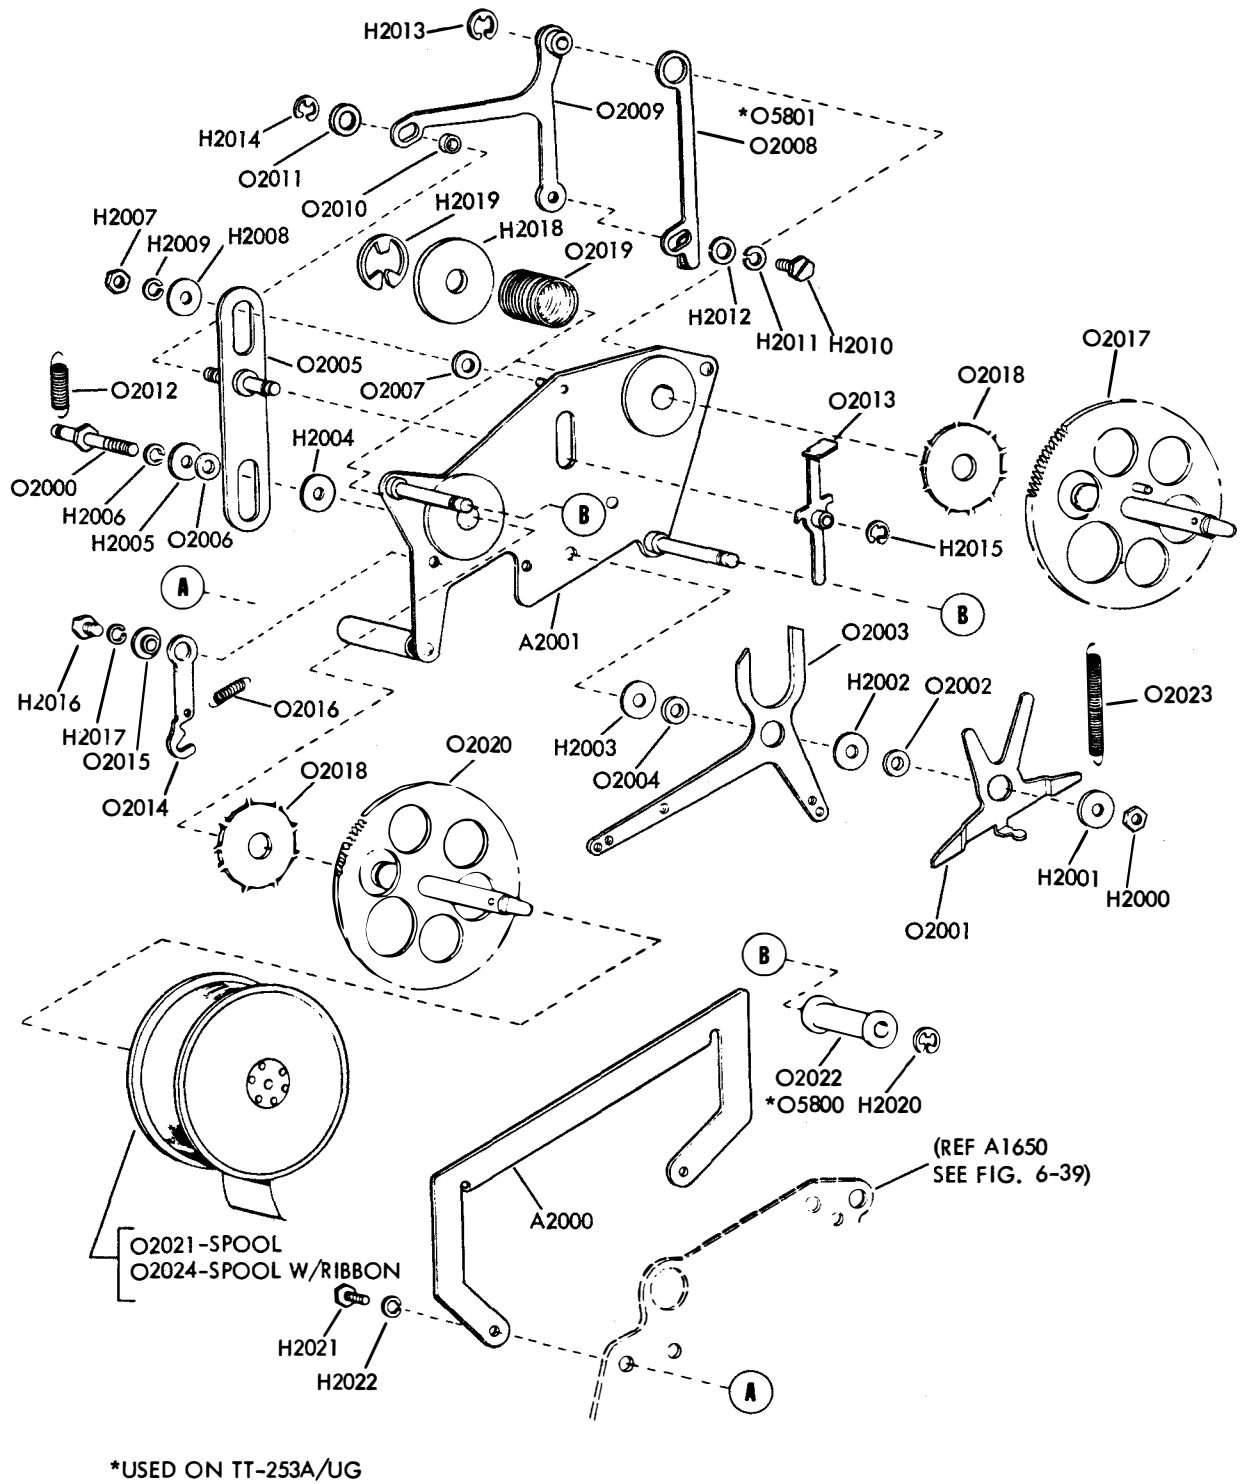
Typing Reperforator, Ribbon Feed Mechanism
